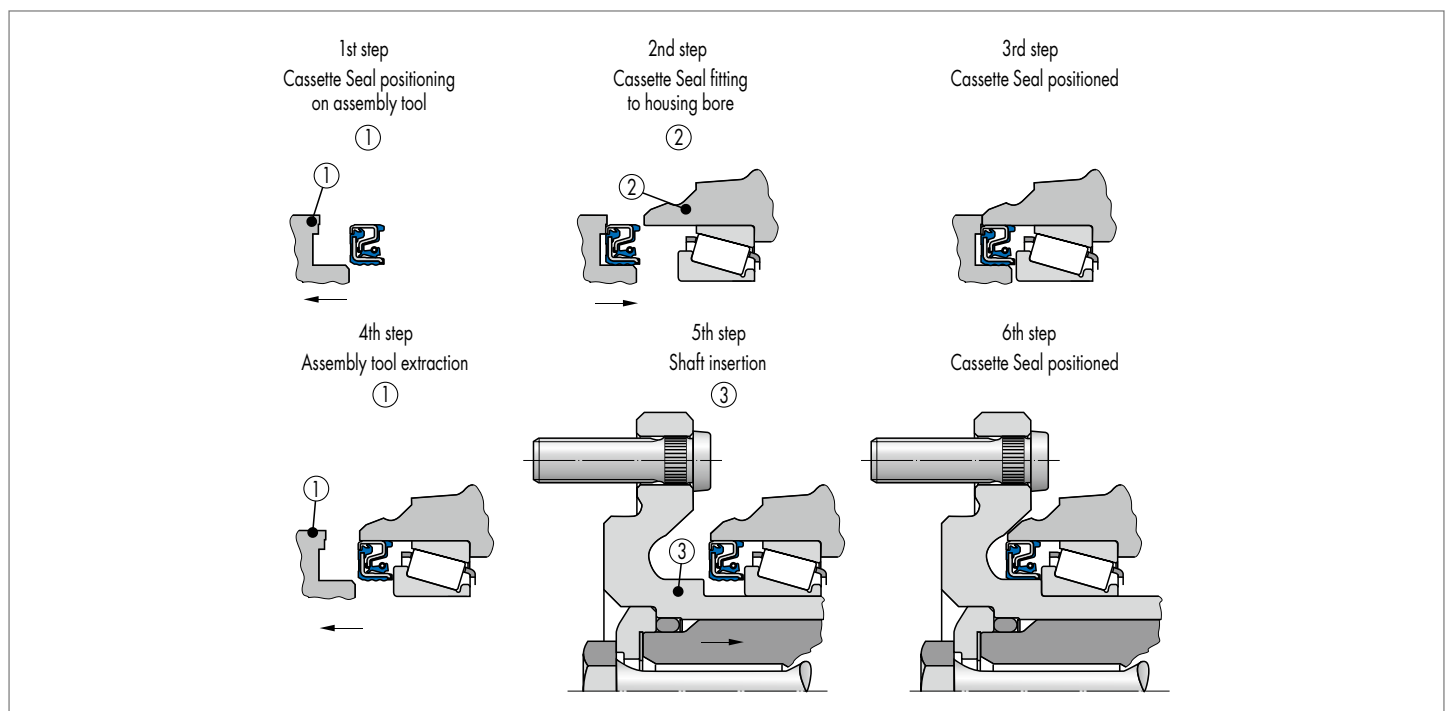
Installation of Simmerring Cassette Seal – Case A (with "bearing stop") / Montage d'une bague Simmerring Cassette Seal – Cas A (avec "arrêt sur roulement") / Montaje de Simmerring Cassette Seal – caso A (con "bearing stop") / Montagem de retentor Cassette – Caso A (com "encosto no rolamento")
